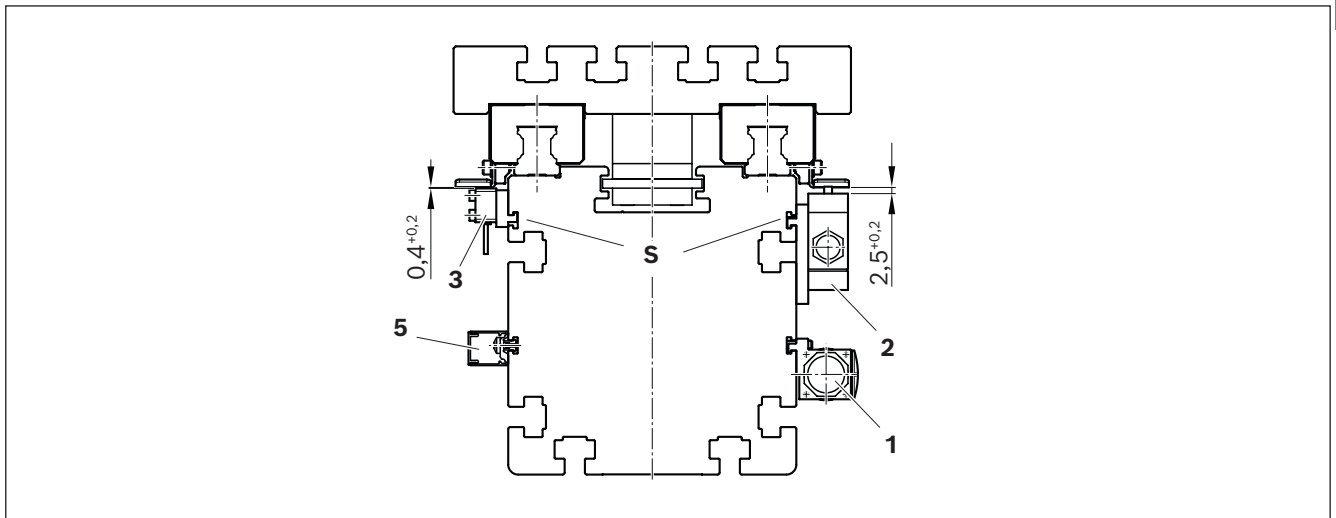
Proximity sensors and mechanical switches MKR-145-NN-3
